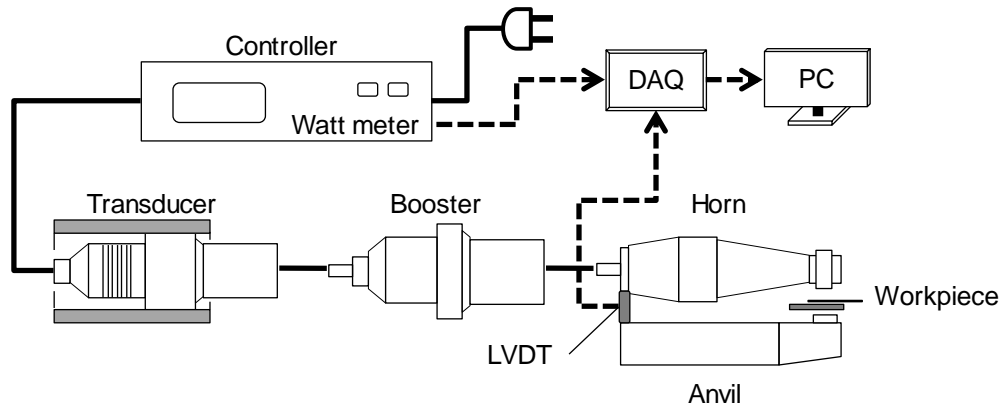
Ultrasonic metal welding system and sensor signal acquisition
